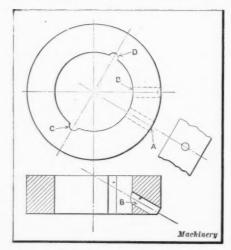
Master Gage for testing Gage shown in Fig. 4
